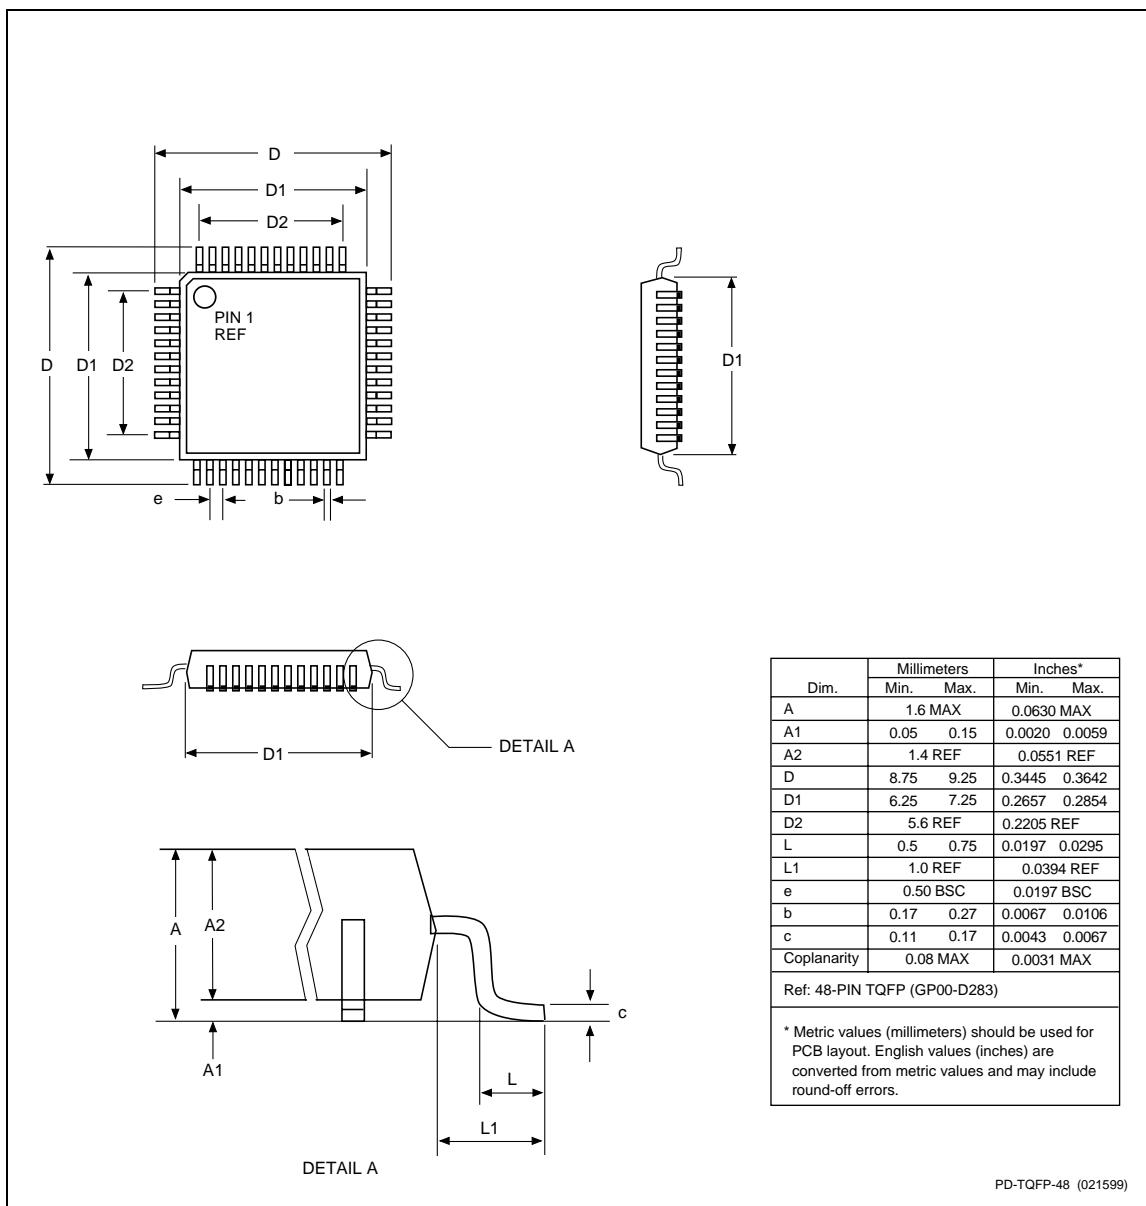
HSD Package Dimensions - 48-Pin TQFP
